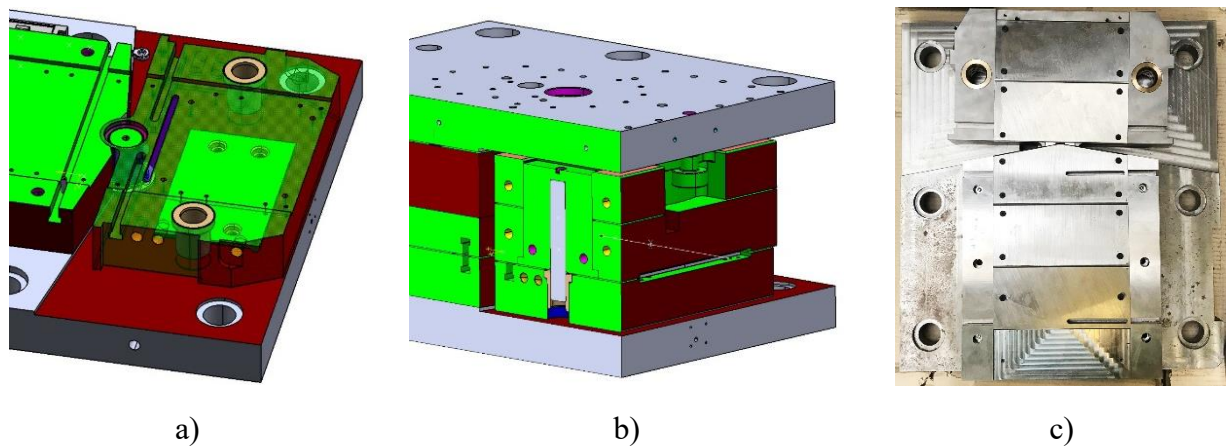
ISB tool modification for in-plane bending of plane sheets. a) Transparent CAD view of the pivoted unit's lower tool to illustrate centric bending axis and sliding plates, b) cut CAD view of the interlocked clamping unit, c) top view of the lower part of the physical tool with segmented tool inserts which allow to stepwise modify the clamping length.
